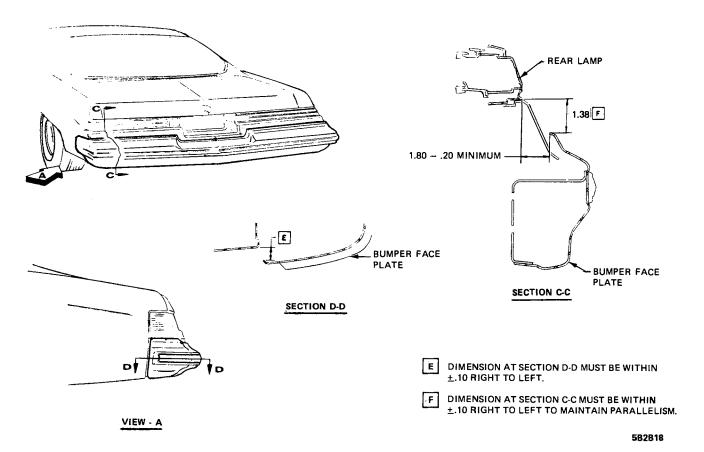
B-18 B Series (Less Wagon) Rear Bumper Clearances
